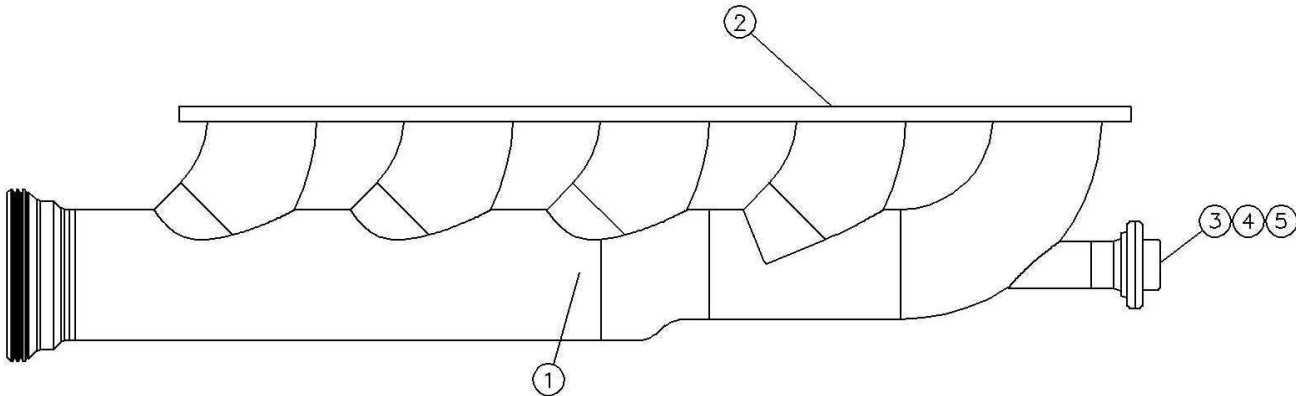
6" ZOOMIE SUCTION MANIFOLD ASSEMBLY & THREADED INLET
